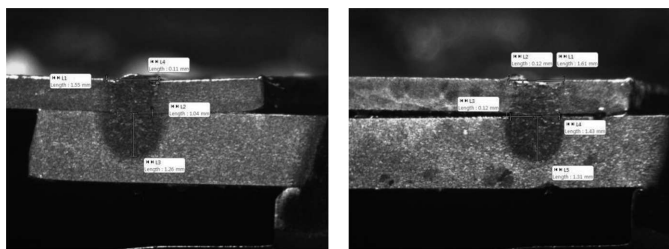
Good quality of MIG welding without micro-jet cooling, 70% of penetration
